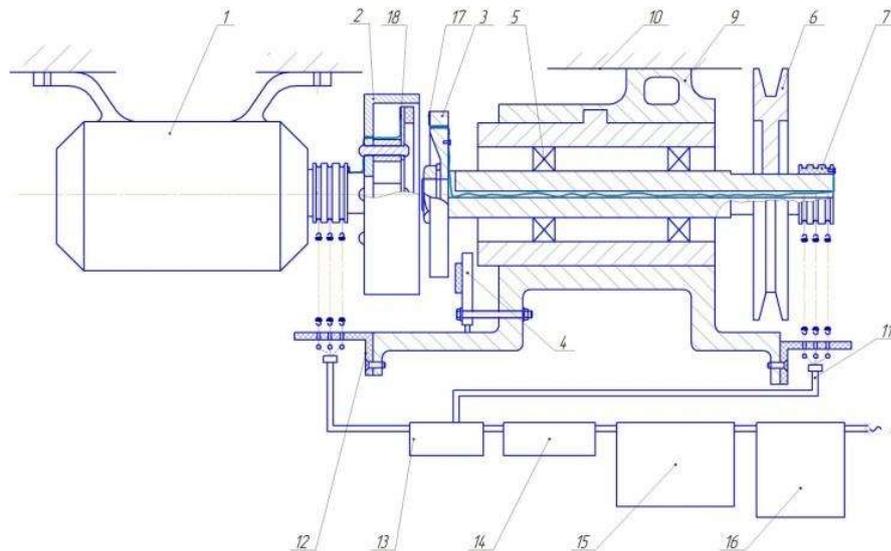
Scheme of the experimental setup for measuring the torque on the drive clutch of the sewing machine
